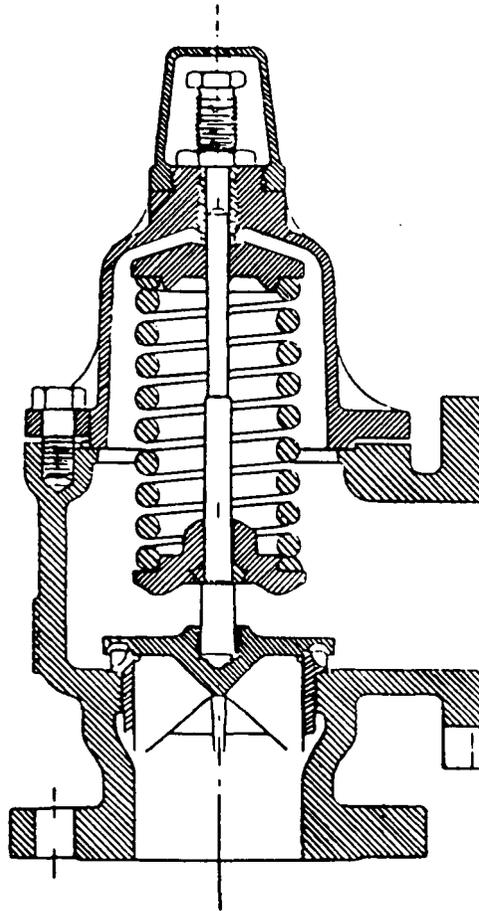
Wing-guided, spring-loaded conventional relief valve.
